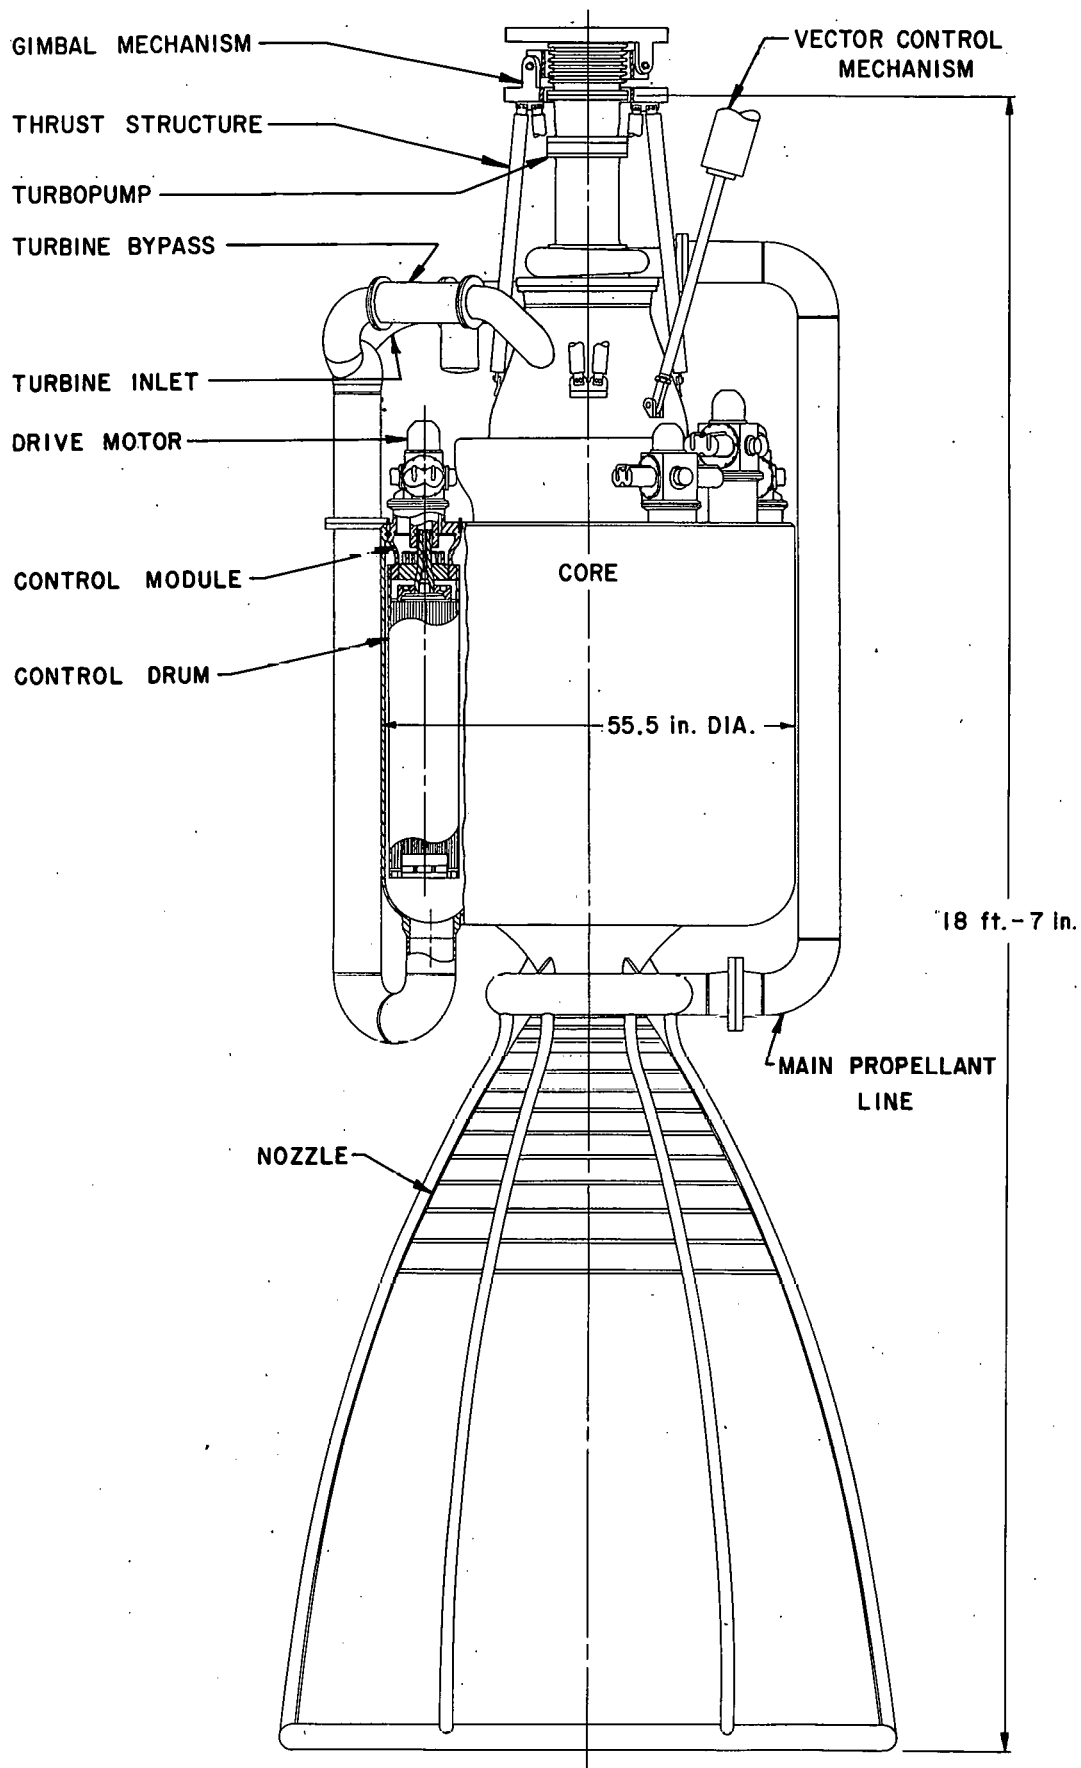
100,000-lb-thrust refractory metal-fueled fast reactor rocket engine
